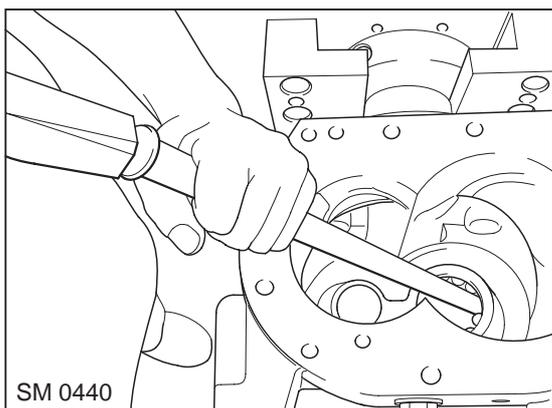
Removing Retaining Circlip - Female Inlet Bearing
